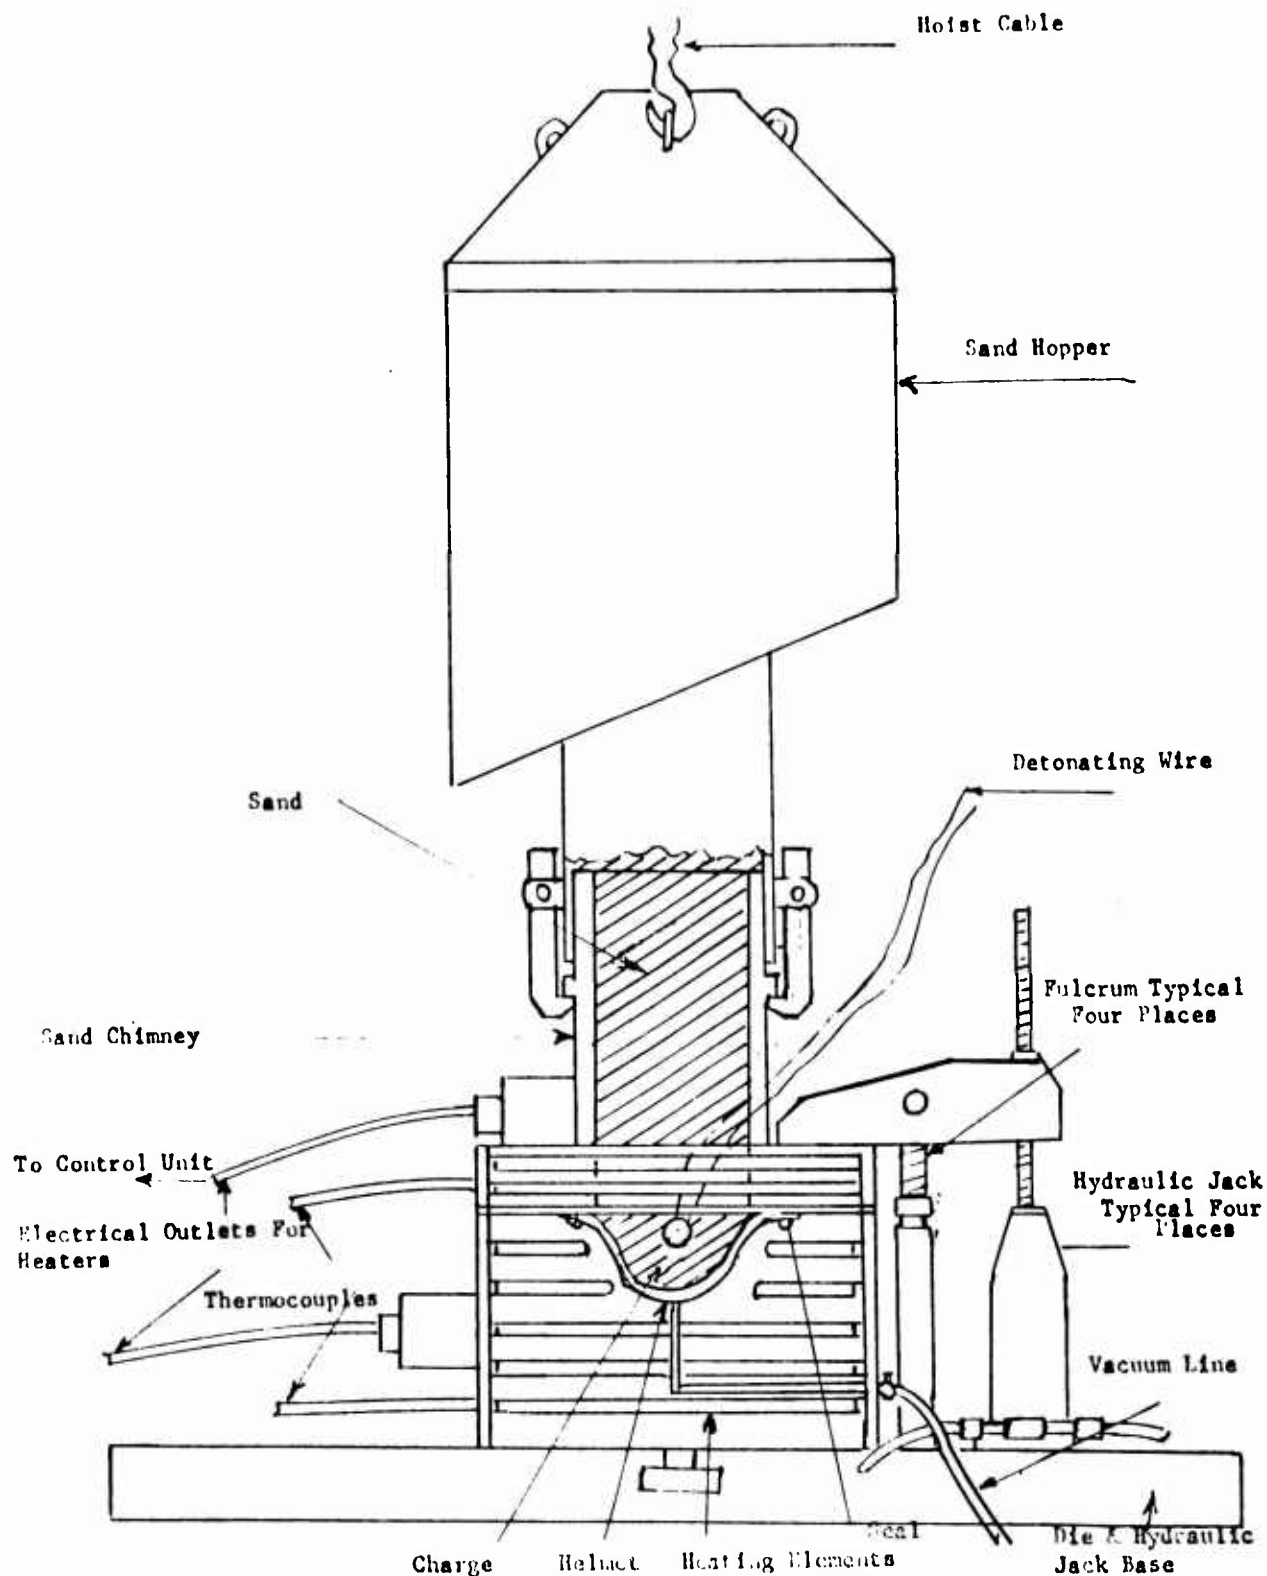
Cross Section of Explosive Forming Set-up Used in Helmet Forming
